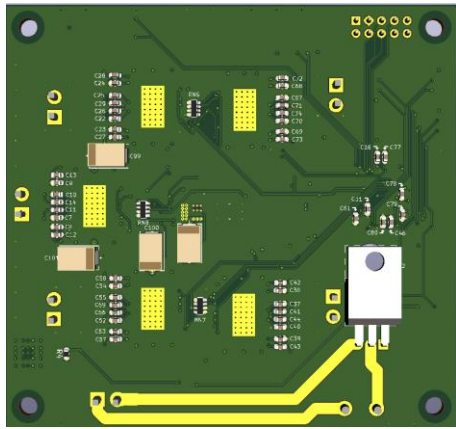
PCB Layout for Motor Driver Heat Dissipation
